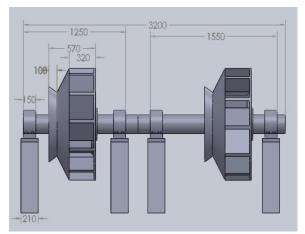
, Shaft, Impeller, and Cushion Assembly (front view)
